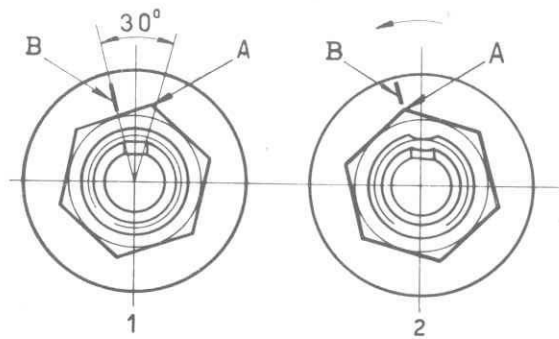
7 To adjust front wheel bearings, the spindle nut is backed off after tightening to correct torque
